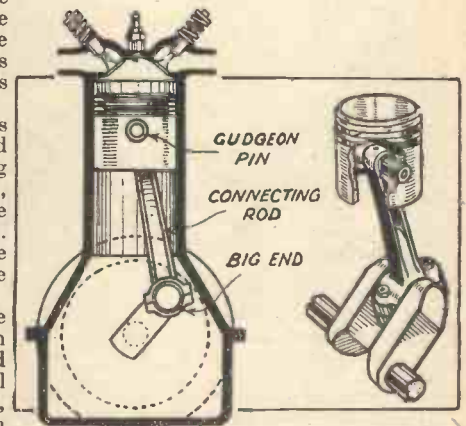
Connecting rod and crank assembly of an automobile engine
